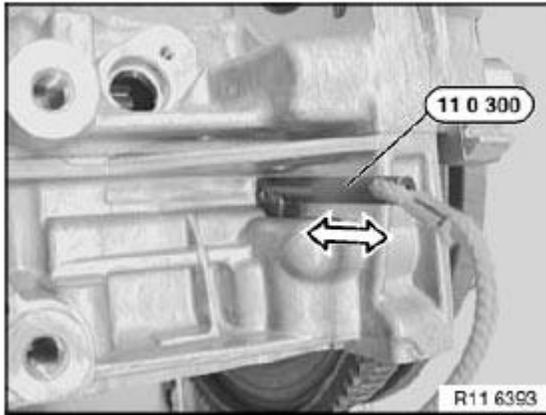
Sliding Special Tool 11 00 300 Into Special Tool Bore For Securing Crankshaft
